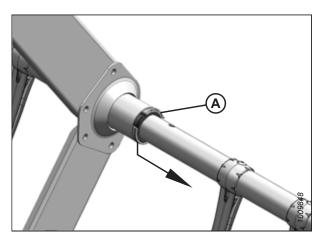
Tine Tube Reinforcing Kit Bushing Clamp – Option
